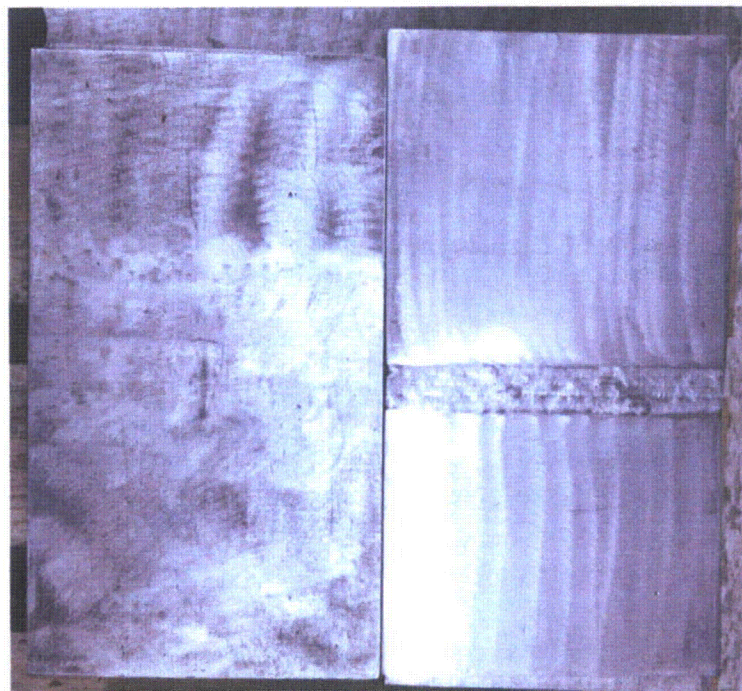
Two Cracked Stainless Steel Samples Used To Test Visual Testing Procedures and Equipment Using Replicas
